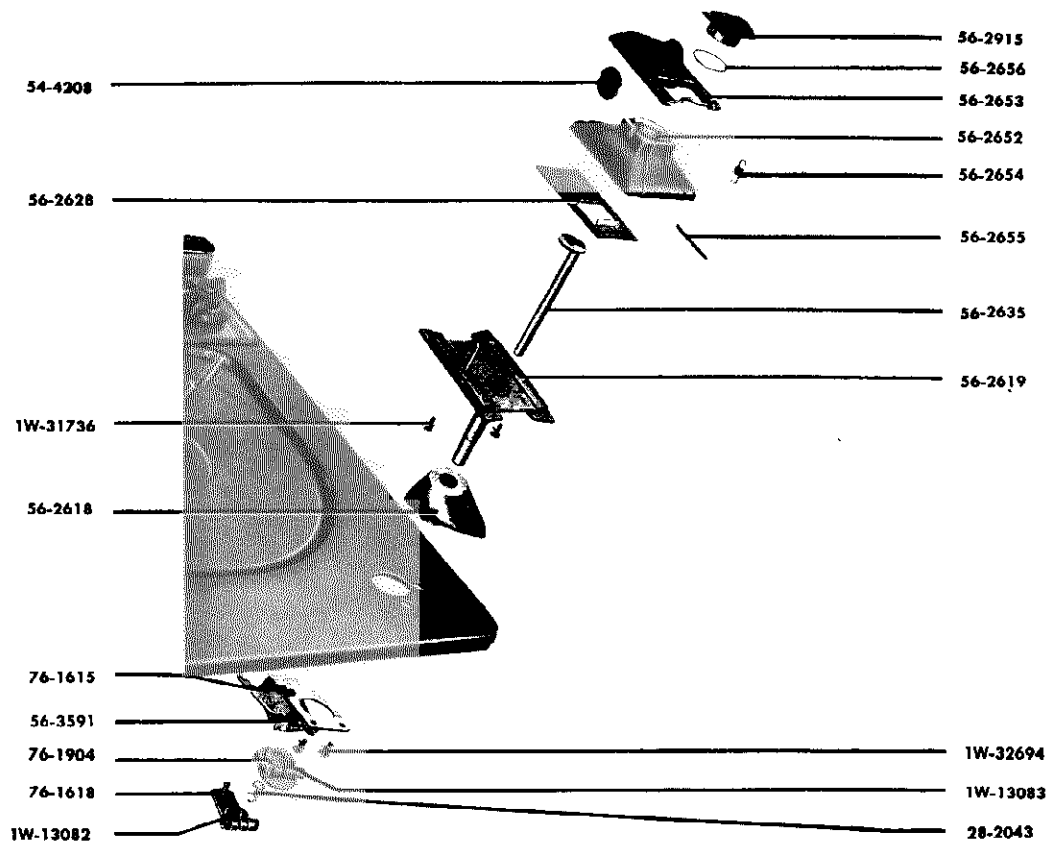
RECORD SHELF AND ASSOCIATED ASSEMBLIES, EXPLODED VIEW.
